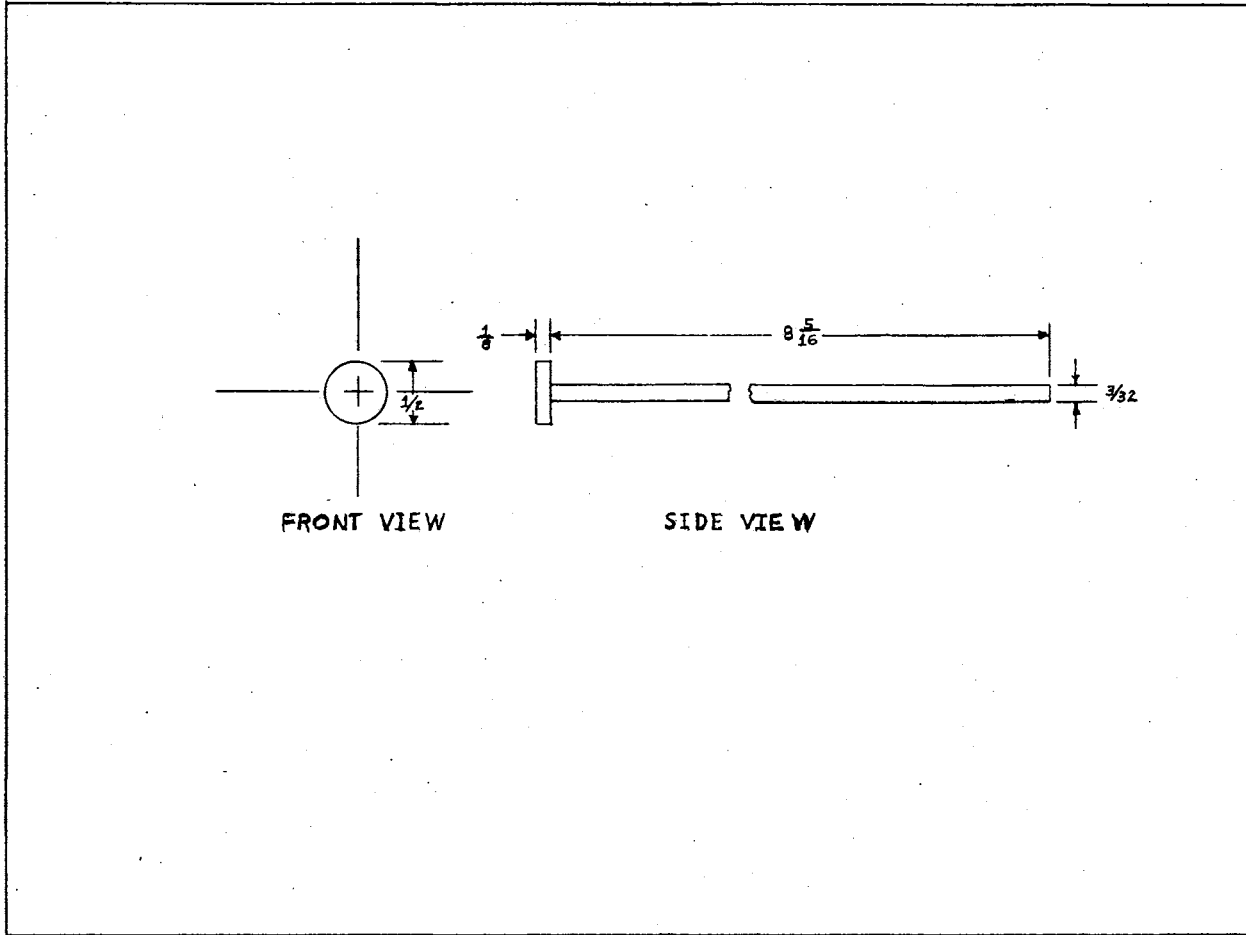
Detailed Dimensioned Drawing of the Front and Side View of the Melt Stick Driving Rod
